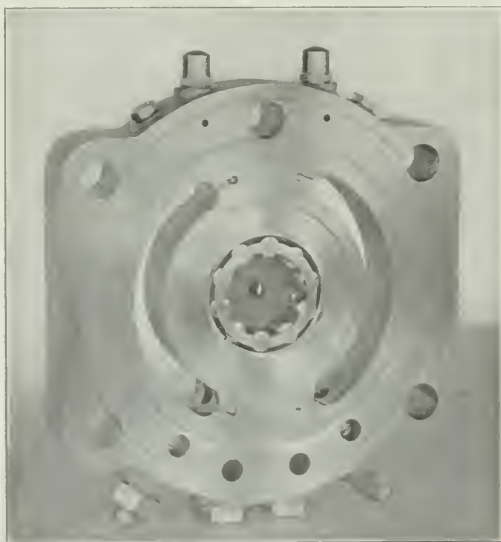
Valve Plate of the Hydraulic Speed Gear.
